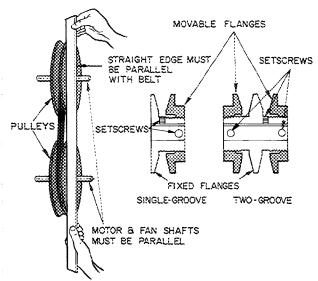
Indoor Air Fan Pulley Adjustment and Alignment
